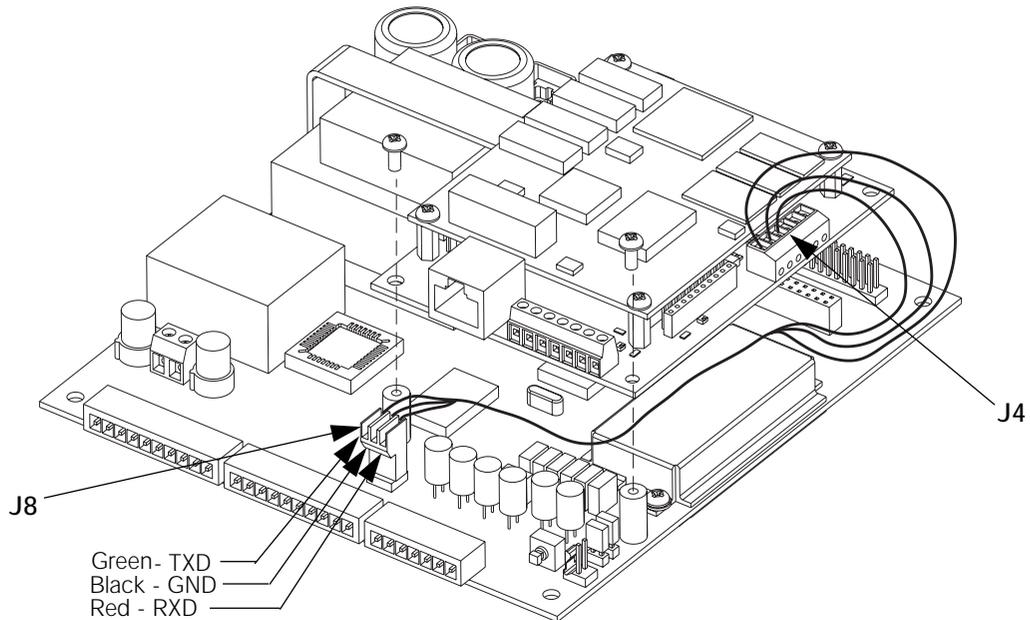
Ethernet Card Installation onto 520 CPU Board
